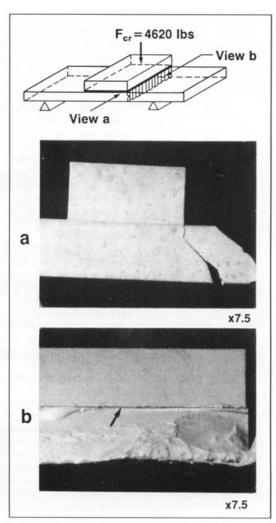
The fracture face of the K92 joint brazed with METGLAS MBF-1011 filler metal. The brazement was manufactured without fillets and was subjected to sandblasting after brazing. Fracture started completely inside of the base metal. High strength of the brazement is achieved.
